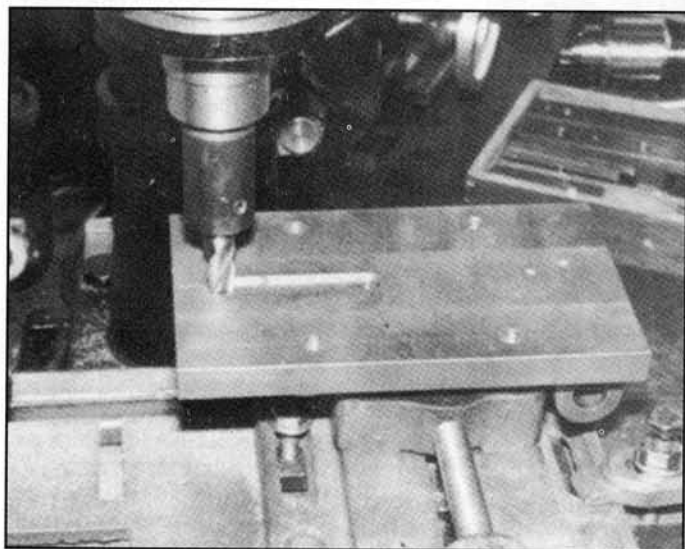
SINE TABLE FOR MILLING MACHINE
